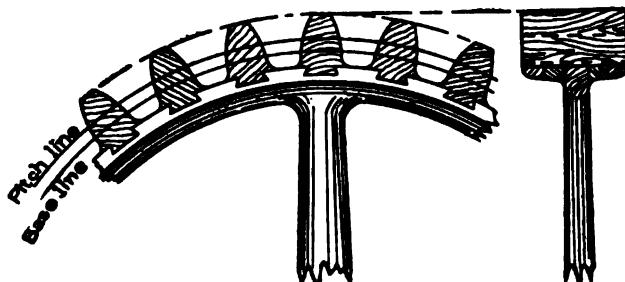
Wood Spur Gear Showing Teeth Dovetailed to Rim
